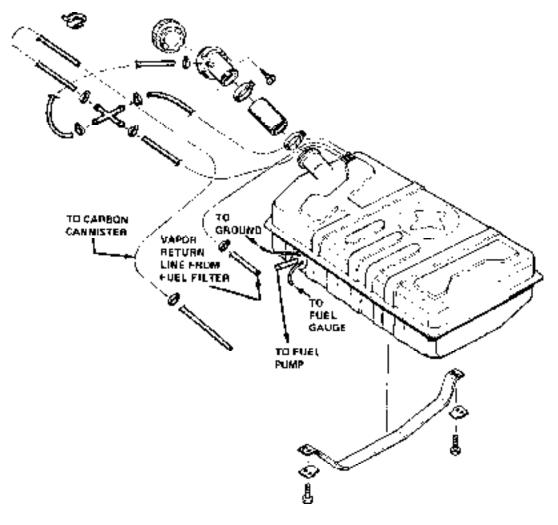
C-4 Exploded View of Opel 1900 and Manta Fuel Tank
